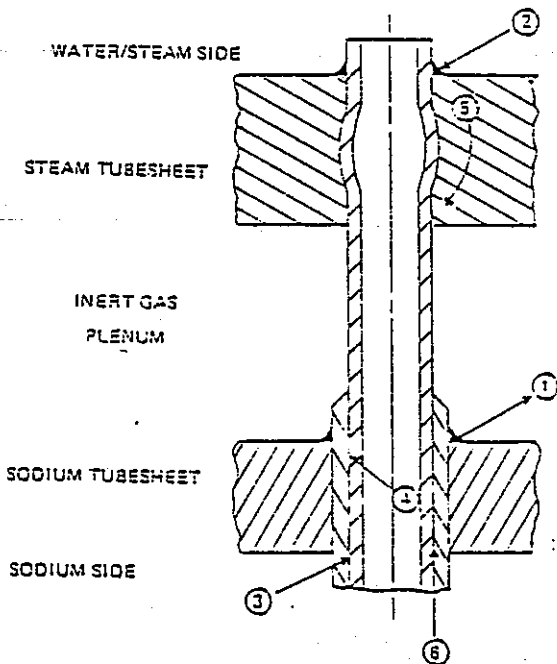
SINGLE WALL-DOUBLE TUBESHEET TUBE-TO-TUBESHEET ATTACHMENT
